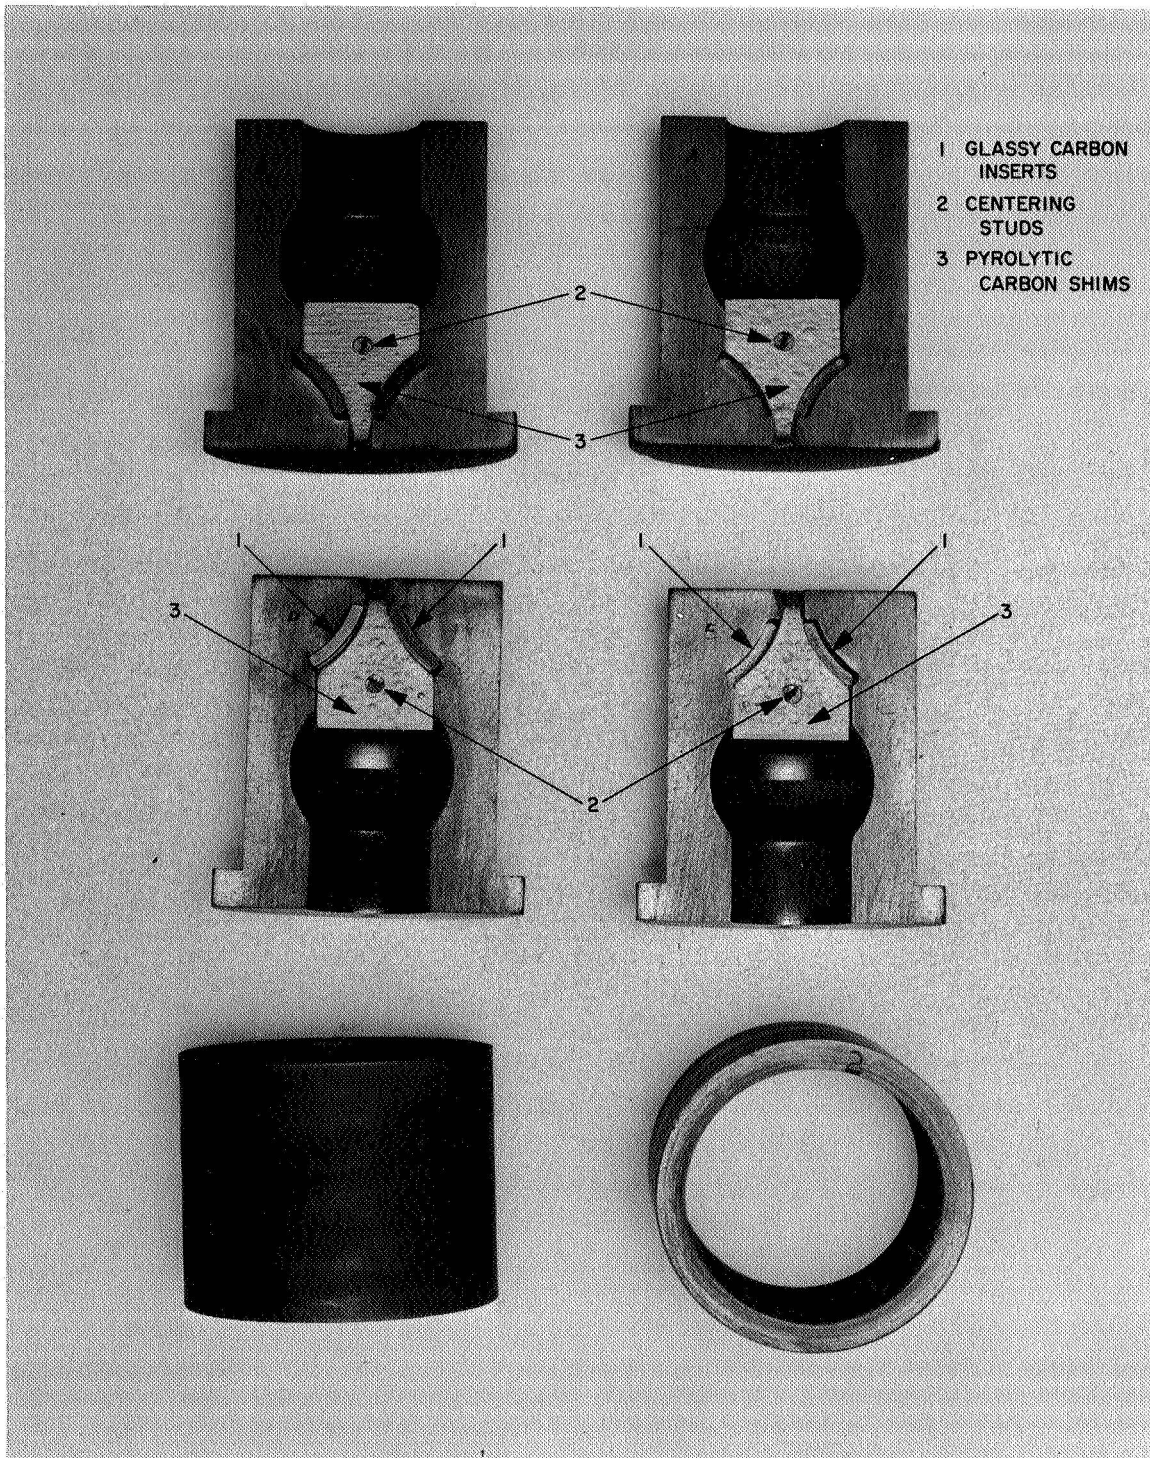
Modified grip assembly showing GC-30 inserts, specimen centering screws and PC clamping shims, the latter not used
